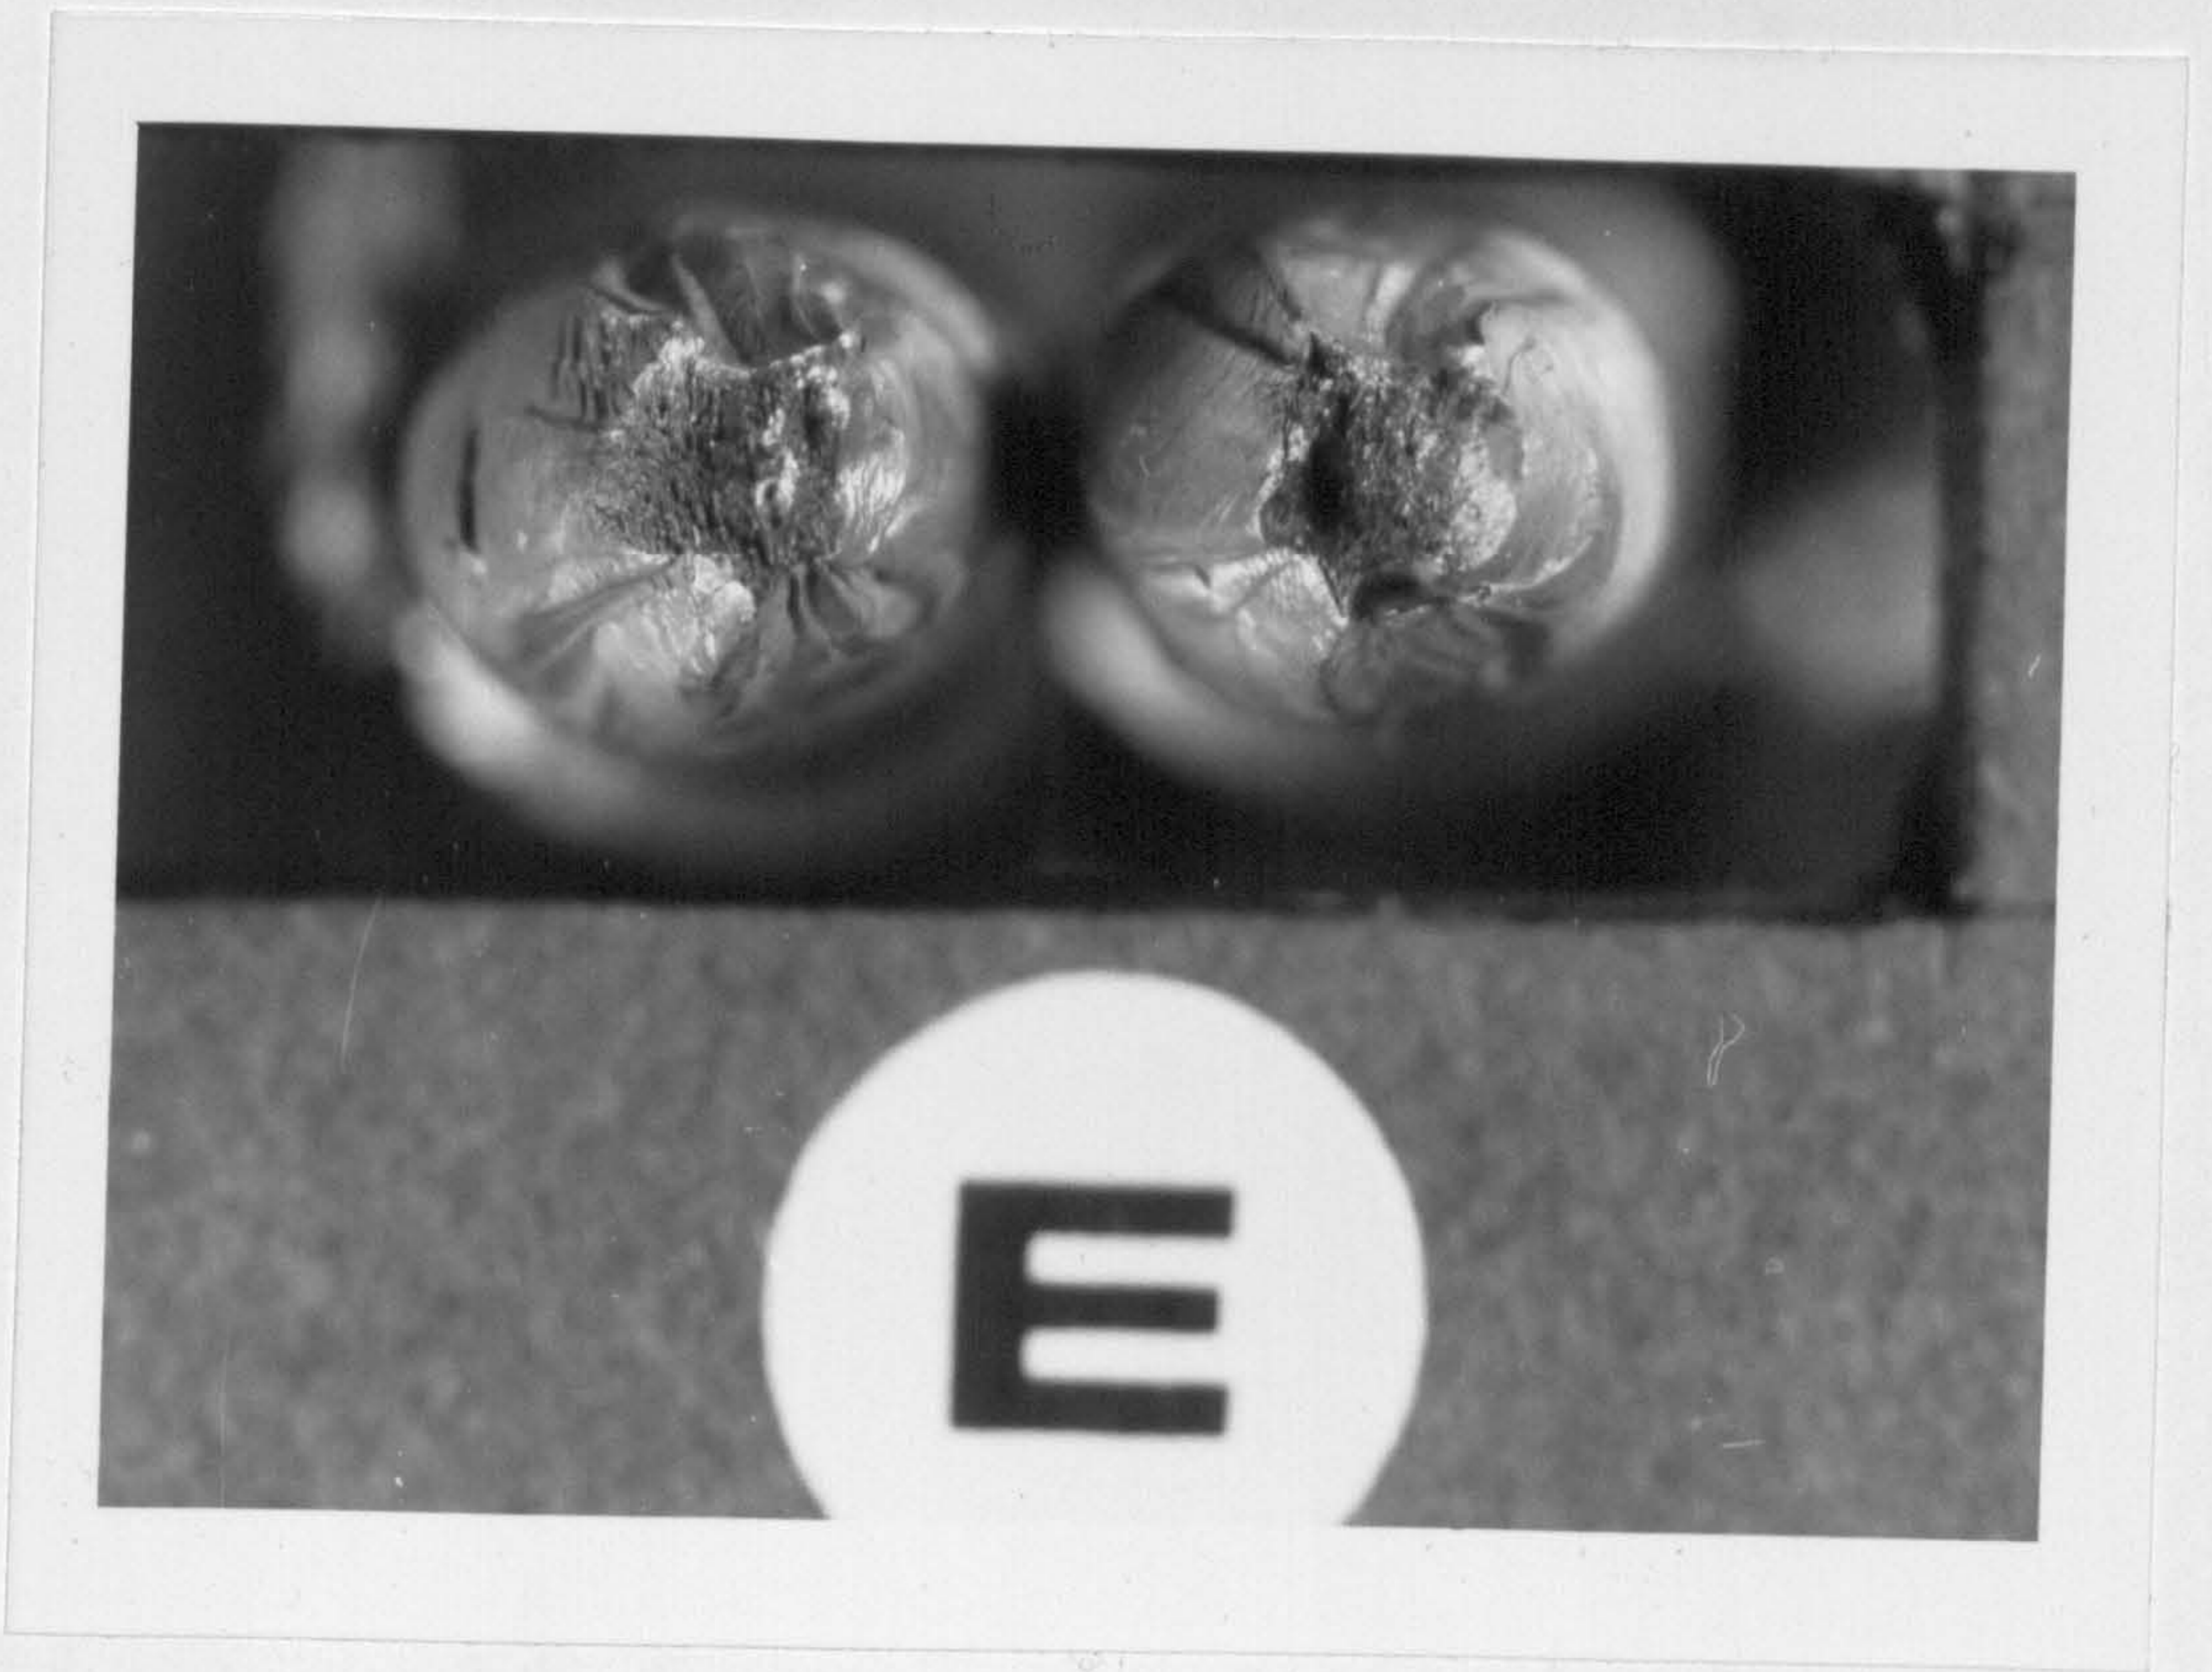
Fracture surfaces for specimen (E), Fig.3.24, tested at 150°C.
